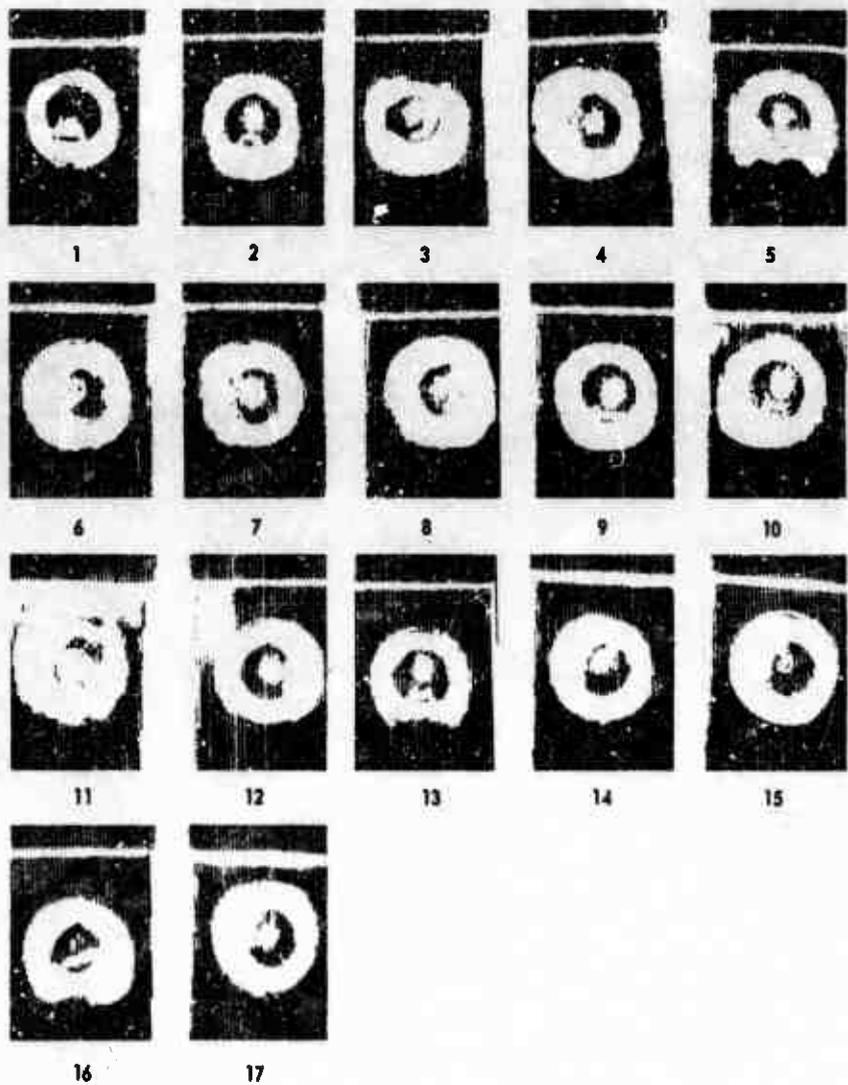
C-Scan Record of Series 11 Welds.
